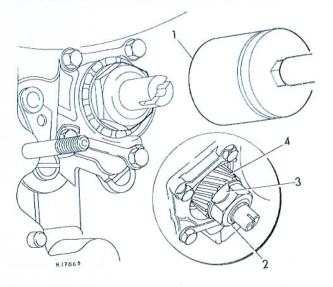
Use of a large socket to undo the final drive pinion retaining nut (Sec 4)
